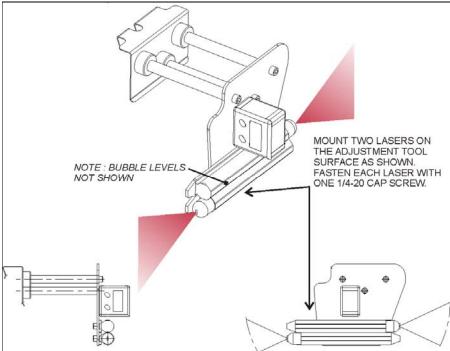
TWO LASERS MOUNTED ON THE ADJUSTMENT TOOL
